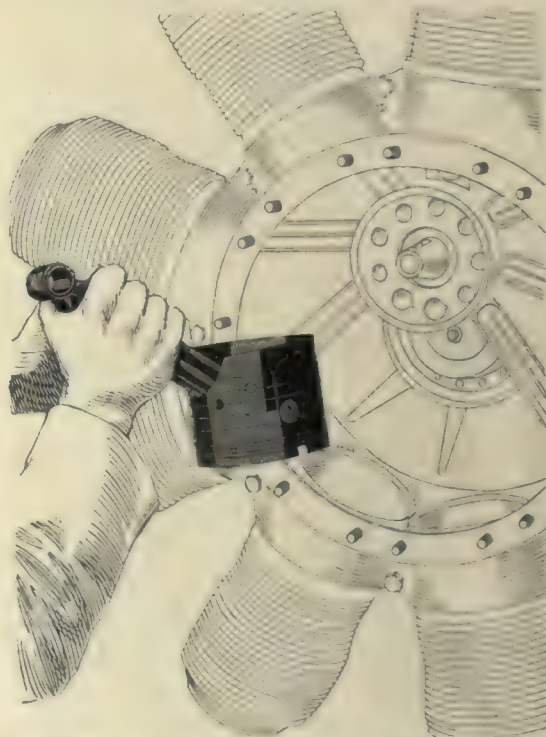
PISTON AND CONNECTING-ROD BEING REMOVED
